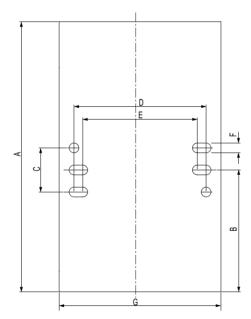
Hole drilling template: Fuse switch disconnector sizes 1, 2, 3
